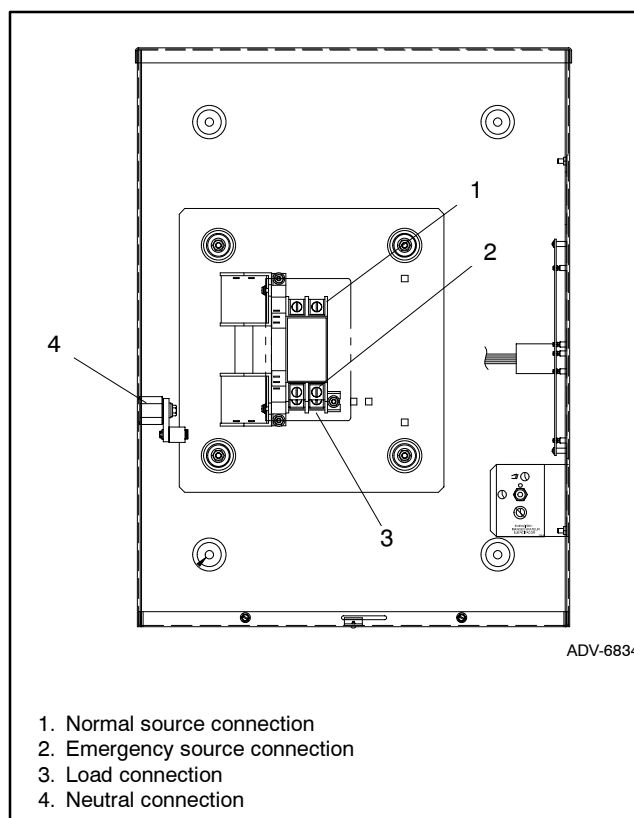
Model G220 Connections (also see the wiring diagram in Section 4)
